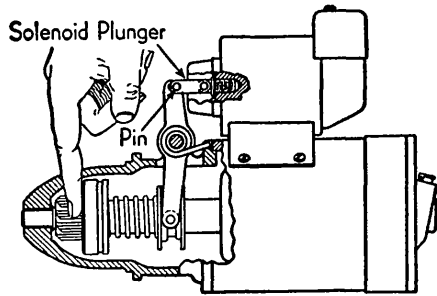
Take lash out of drive clutch as shown when adjusting pinion travel
